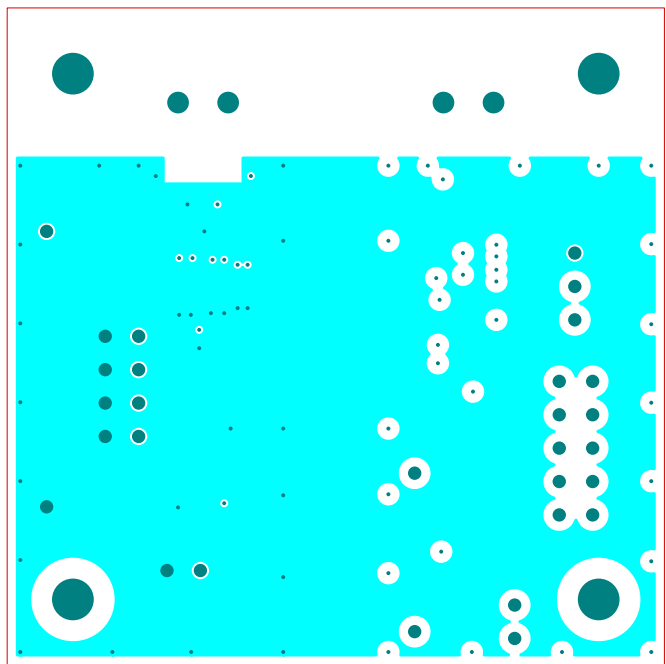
Internal 1 Layer of the SI86Pxxx PCB
